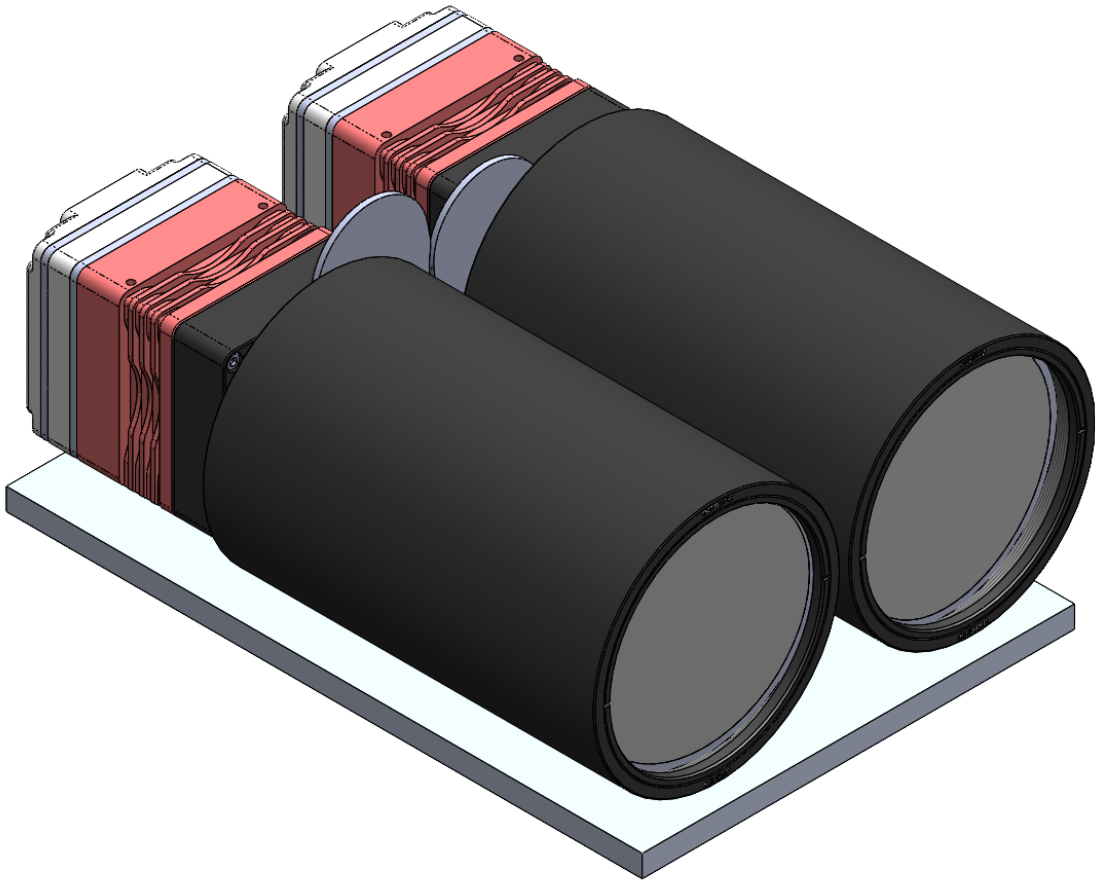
Rev 3 - A lens tube approach is used to mount the optical components. At this point in the design, a single COTS lens tube holds all the lenses, with the idea that adapter mounts will be built for each lens to screw into the main tube. A larger aperture was implemented to give a higher signal to noise ratio. During this revision several shutter designs were investigated. The final shutter design during this revision is a single mount in between the cameras with two solenoid actuators.
